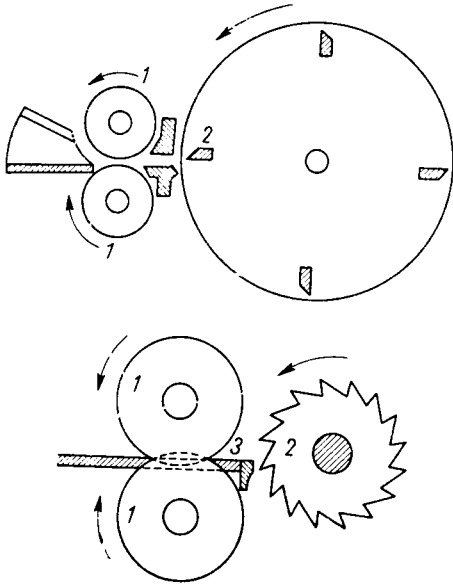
A French design for cutters for wide powder strip, according to Vennin *et al.* [13]; 1—rollers cutting lengthwise; 2—rotational knife cutting crosswise; 3—fixed knife.
